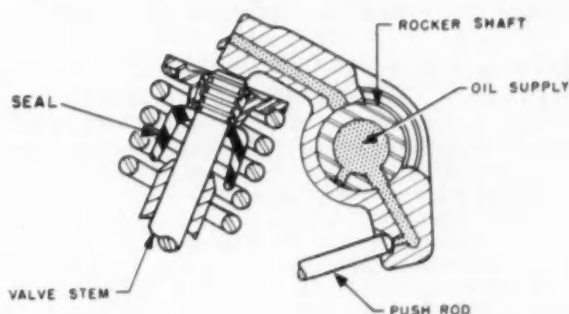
Intake valve rocker is lubricated by oil at pressure less than main gallery pressure through the hollow rocker shaft. Drilled holes admit it to the push rod socket and valve stem.
